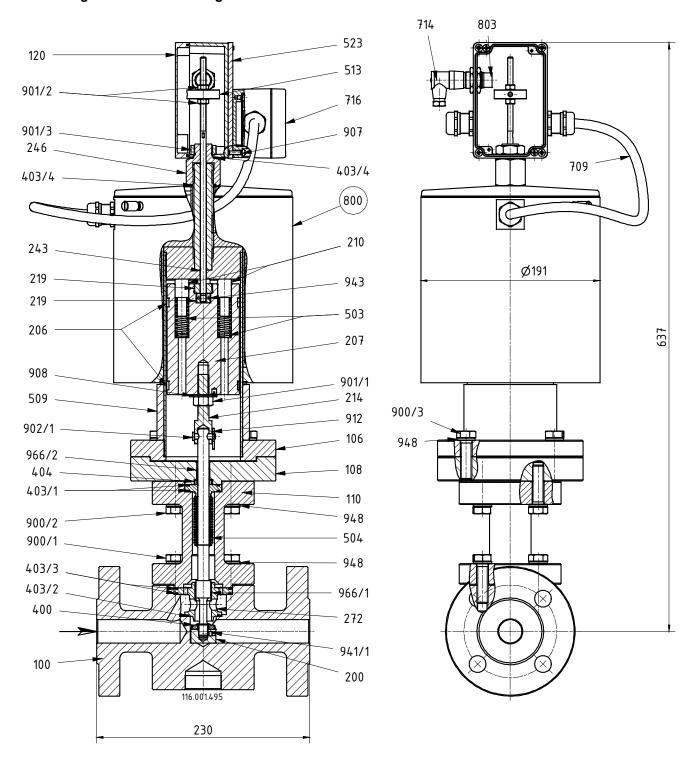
sectional drawing 40/50/55-EVF-R.. (PN 63) (2 limit switch)
